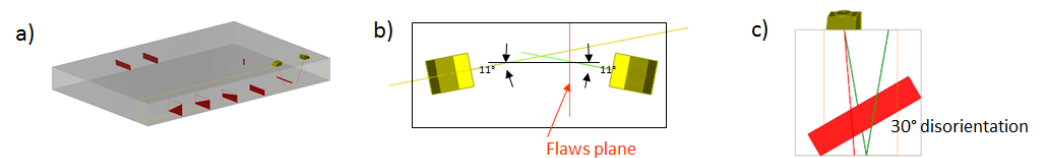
(a) A planar component containing disoriented backwall breaking flaws and a 2 mm diameter SDH; the TOFD configuration with the 11° probes' skew: (b) top view and (c) side view showing the flaw used for simulating the top edge of the 30° disoriented notch.
